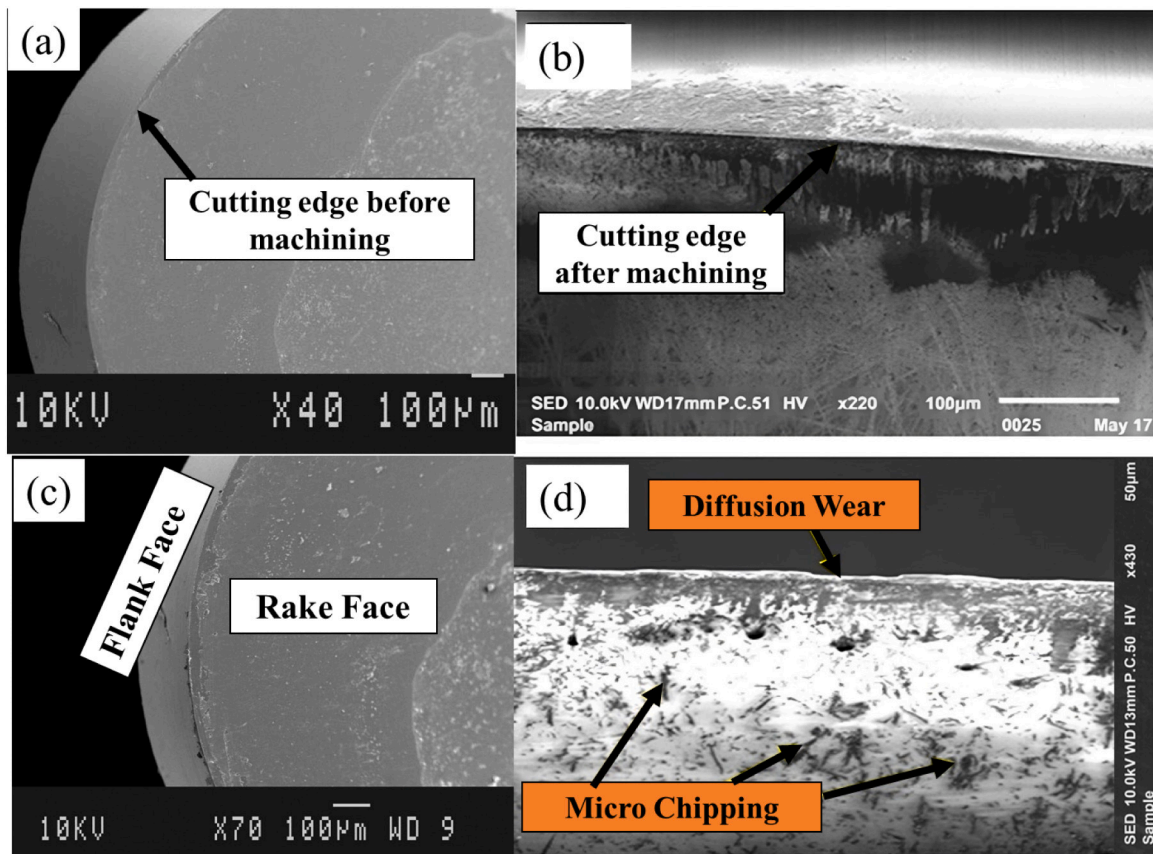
SEM examination the diamond tool with 5 mm tool nose radius (a) Pristine cutting edge before machining (c) Tool wear after a cut distance of 100 m. Zoomed view of the (b) Cutting edge (d) Diffusion wear and Micro chipping on tool.
